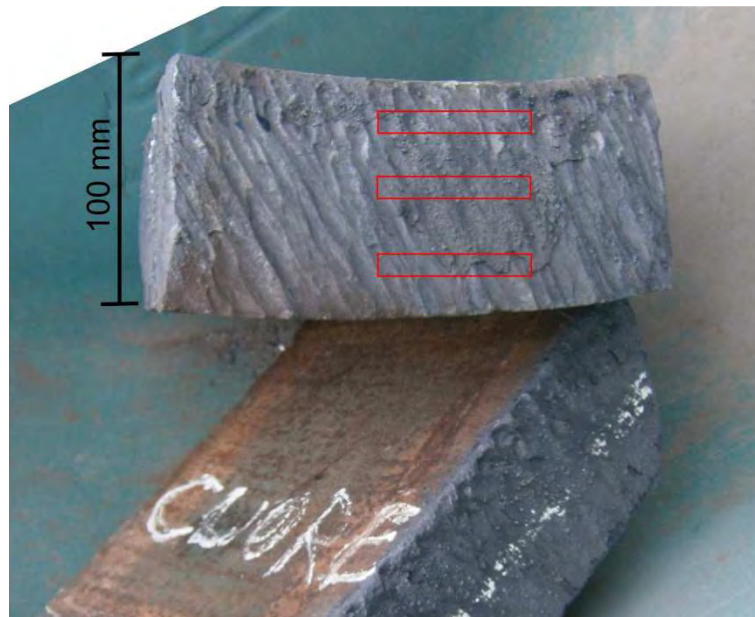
Piece of casting cut from a gyratory liner. The rectangles indicate the regions where the specimens were extracted.
